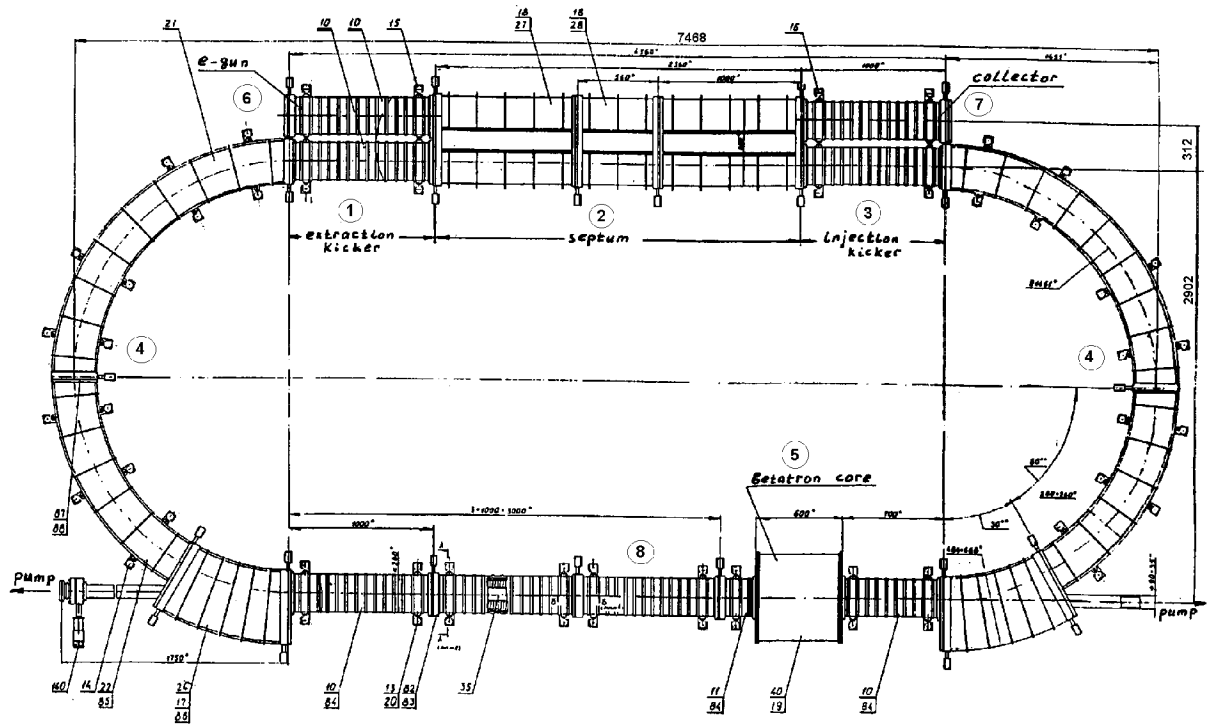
The assembly drawing of the LEPTA: 1 - extraction kicker, 2 - septum, 3 - injection kicker, 4 - toroidal sections, 5 - betatron core, 6 - electron gun, 7 - electron collector, 8 - cooling section.
